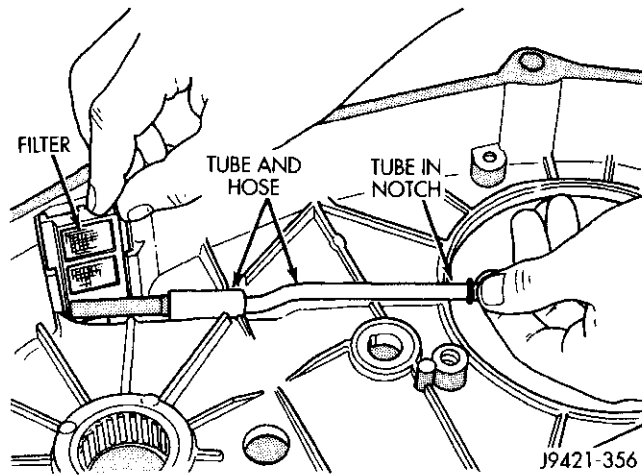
Oil Pickup Tube And Filter Position In Rear Case
